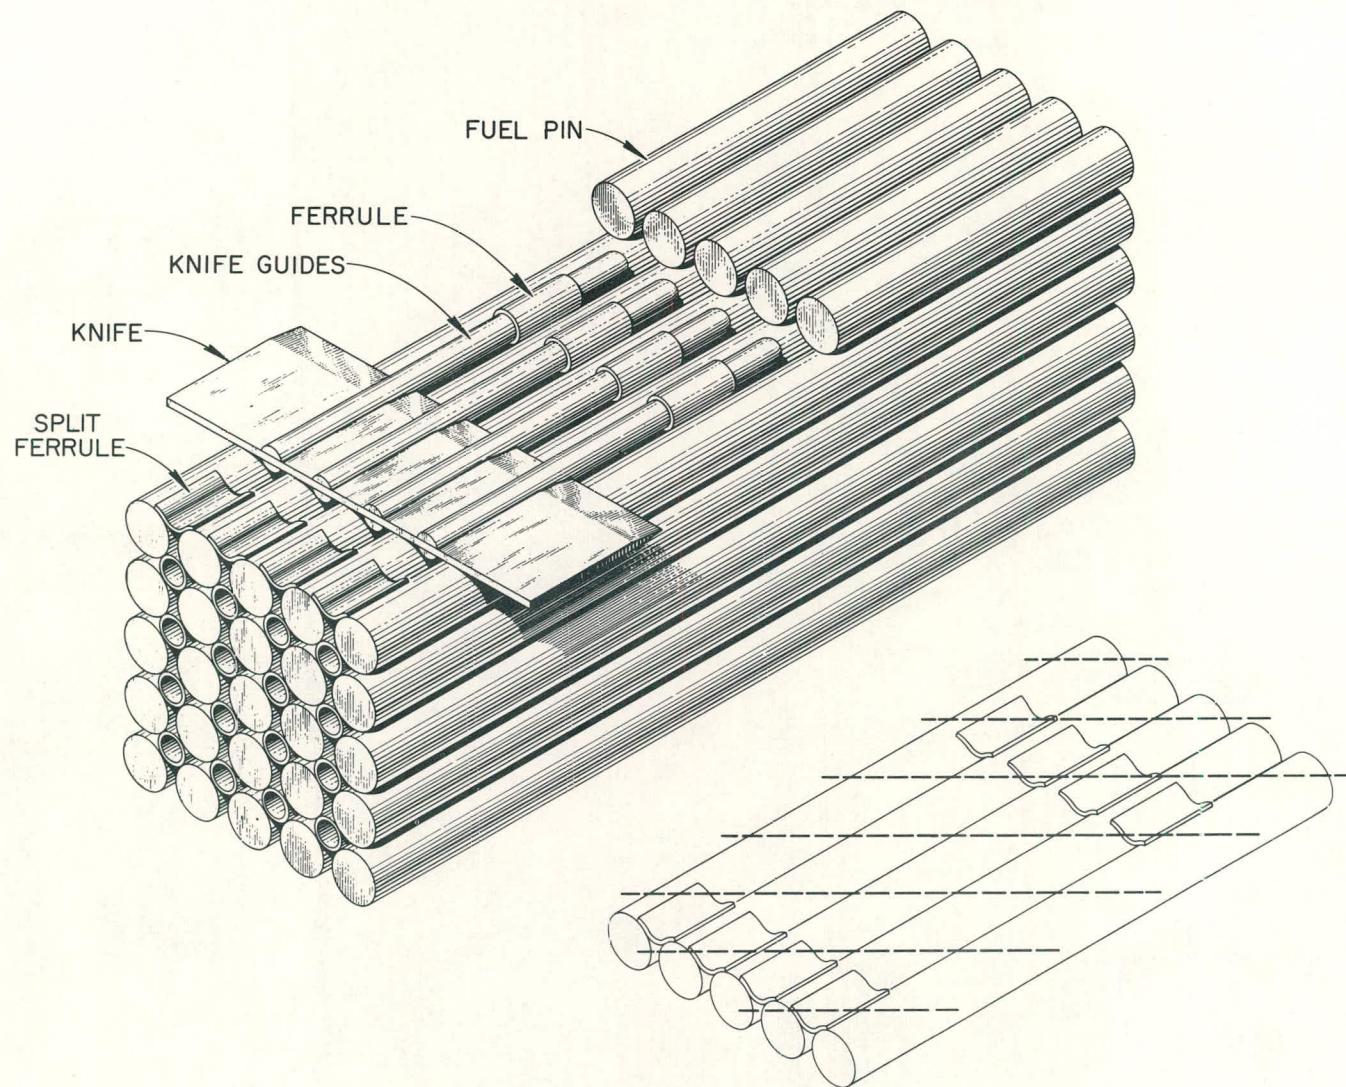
Ferrule Splitting Tool for Separating Slabs of Tubular Elements from a Fuel Assembly.
